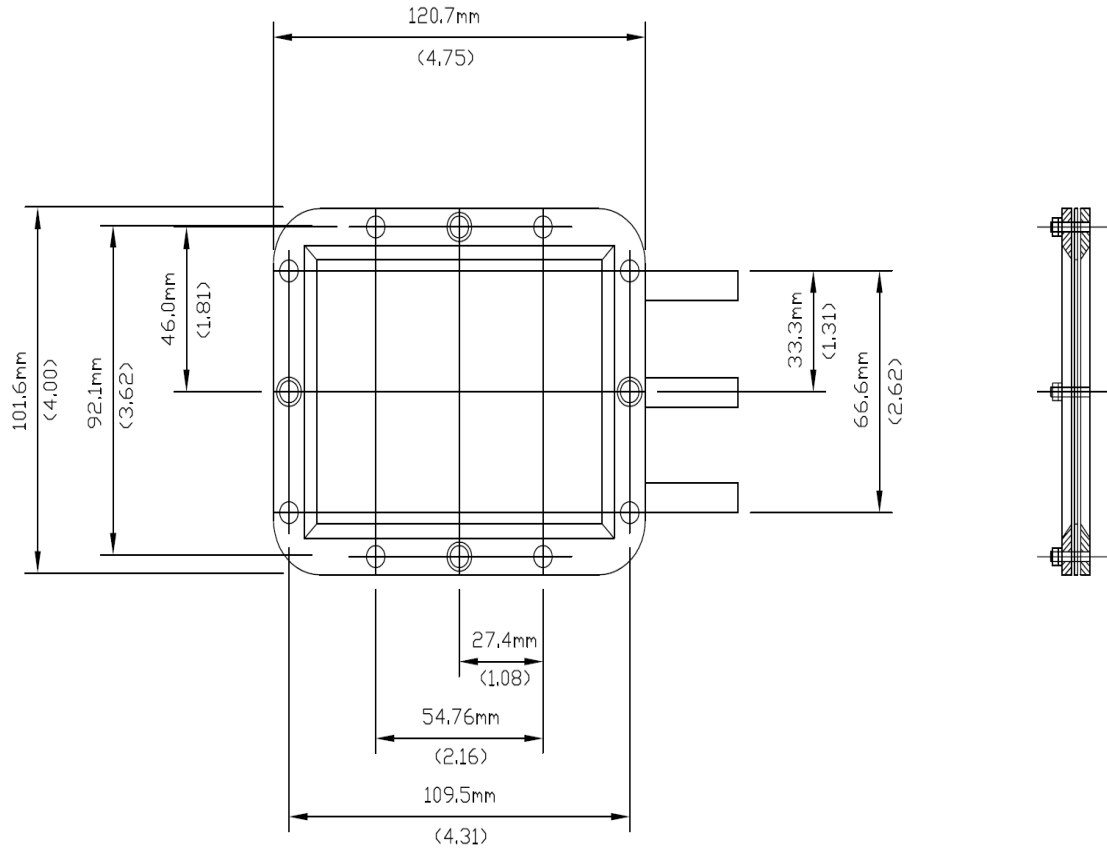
11. Schematic drawing and dimensions of the MCP used for the recoil detector. The electrical contacts to the front and back faces of the MCP and the anode are shown on the right-hand side.
